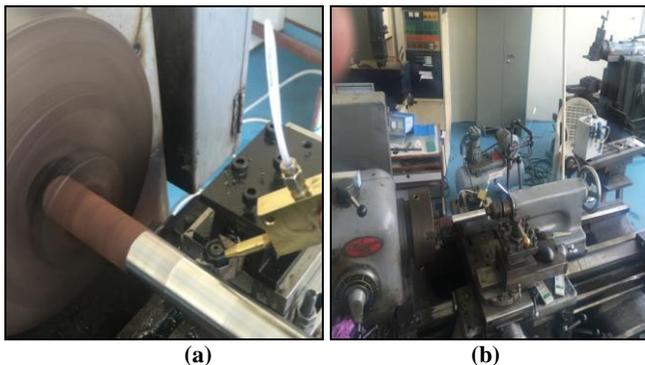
(a) Nozzle used in MQL setup, (b) MQL setup used with lathe machine
